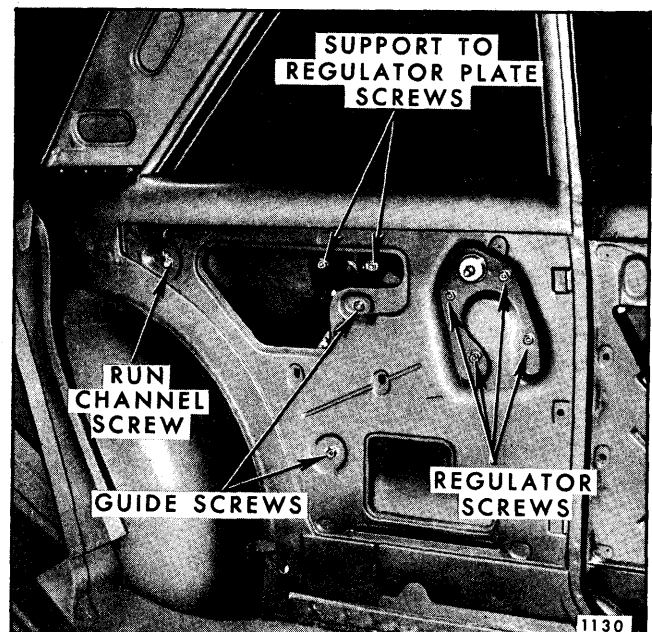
Rear Quarter Hardware Attachment - "X-11" Style
